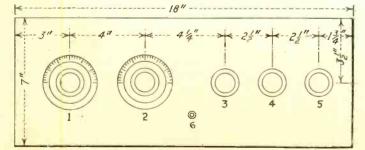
Panel layout for 4-tube Super-Heterodyne.
